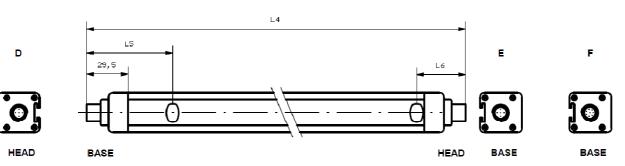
; Chap.:10 Dimensions of Master and Slave models; view of the base and head with relevant connectors; see Tab.:2 and 3
